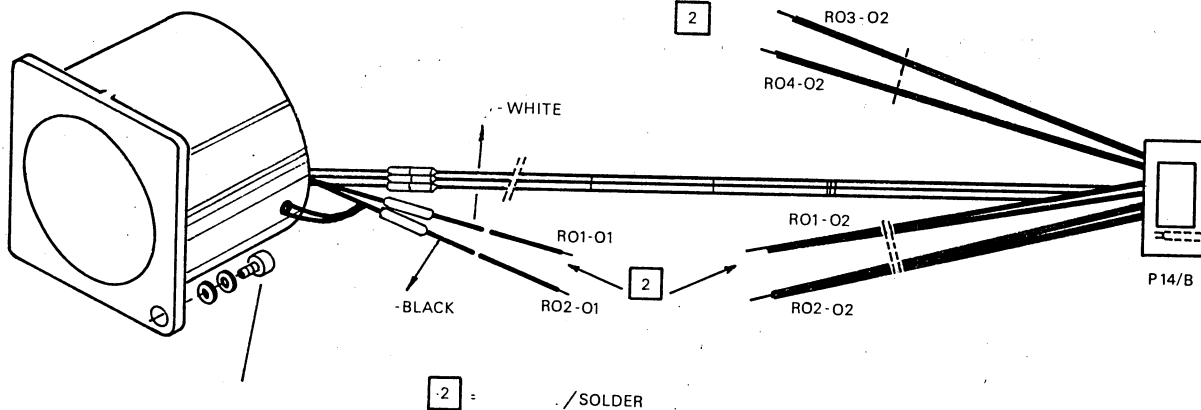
Carriage Motor Assembly for the Mina Mechanics
